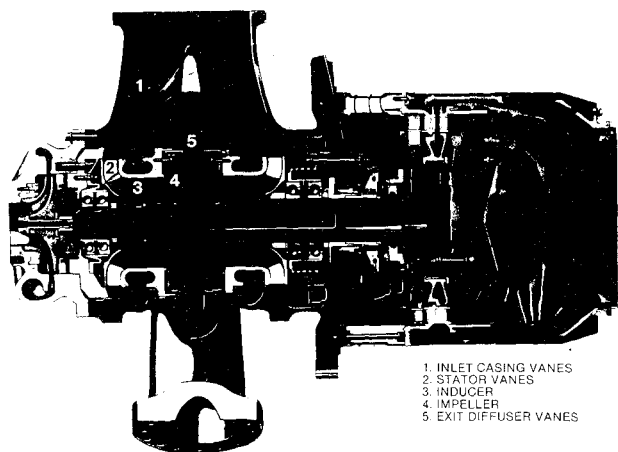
Cross-sectional view of the high-pressure oxidizer turbopump (Rocketdyne).
